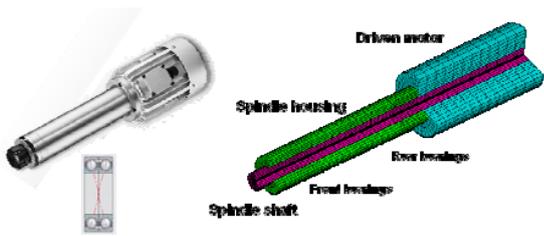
High speed engraving spindle unit and finite element model, including the housing, shaft and bearings.
